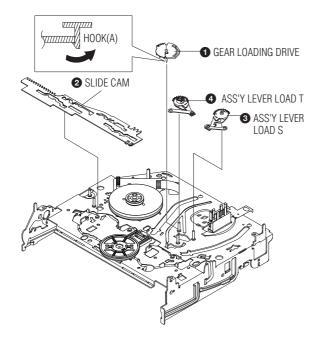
Gear Loading Drive, Slider Cam, Ass'y Lever T, S Load Removal
